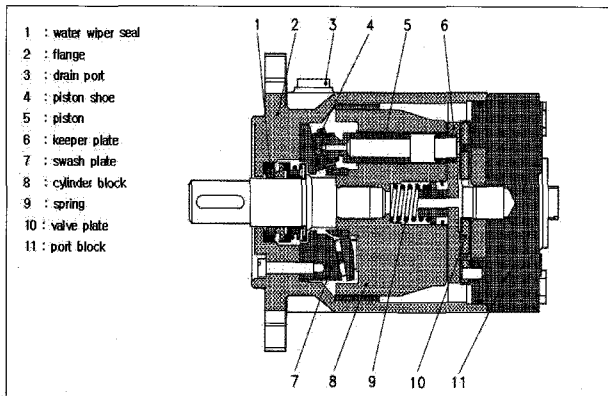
Structural Drawing of the Water Hydraulic Pump
